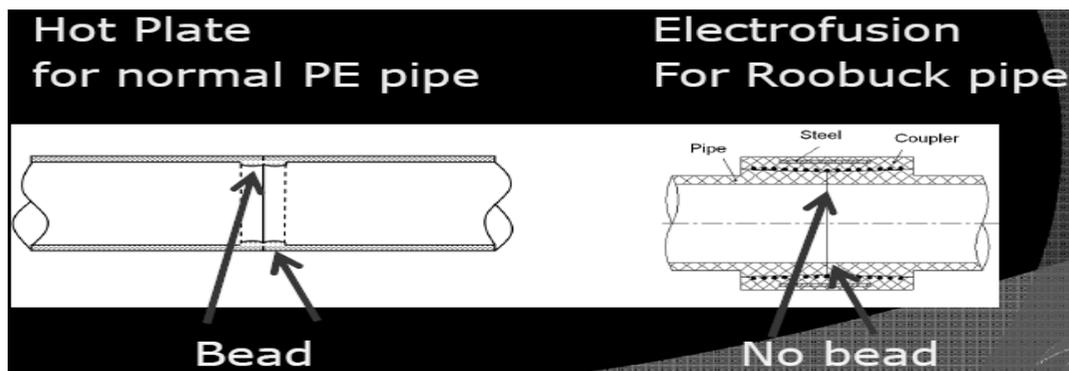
Electrofusion welding is used in steel wire reinforced HDPE pipes and un-reinforced ones [17].
